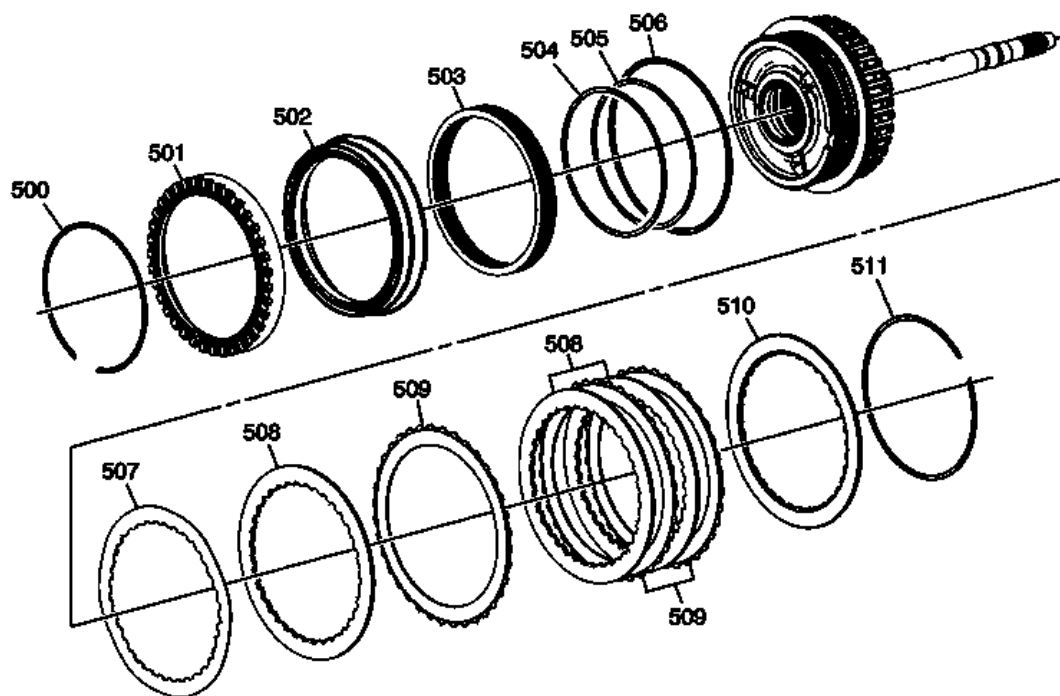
View Of 3-5 Reverse Clutch Assembly
